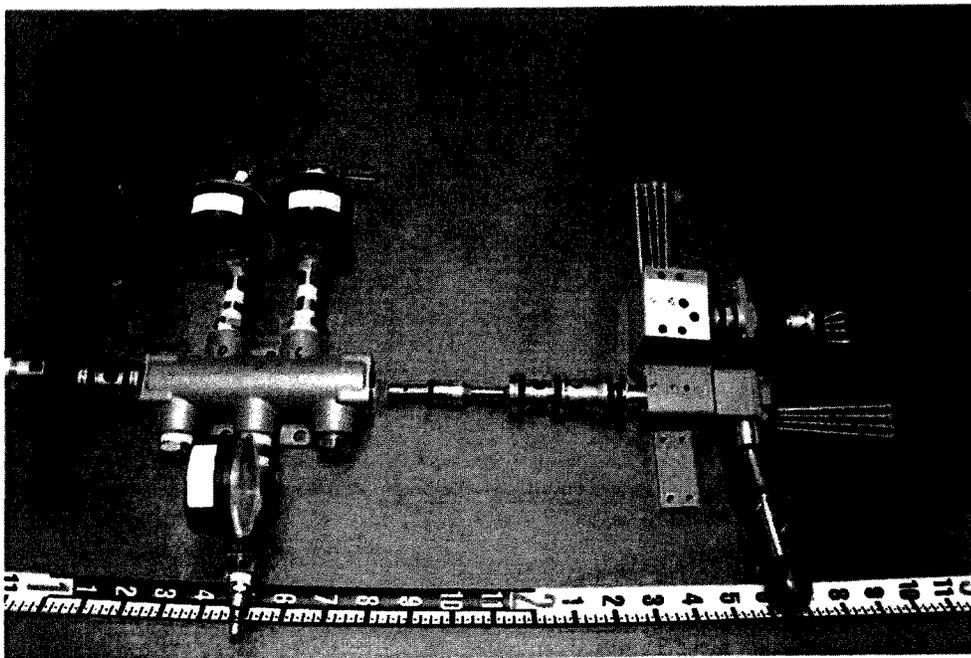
Disassembled Exemplar Versa Bottom Dump Valve
